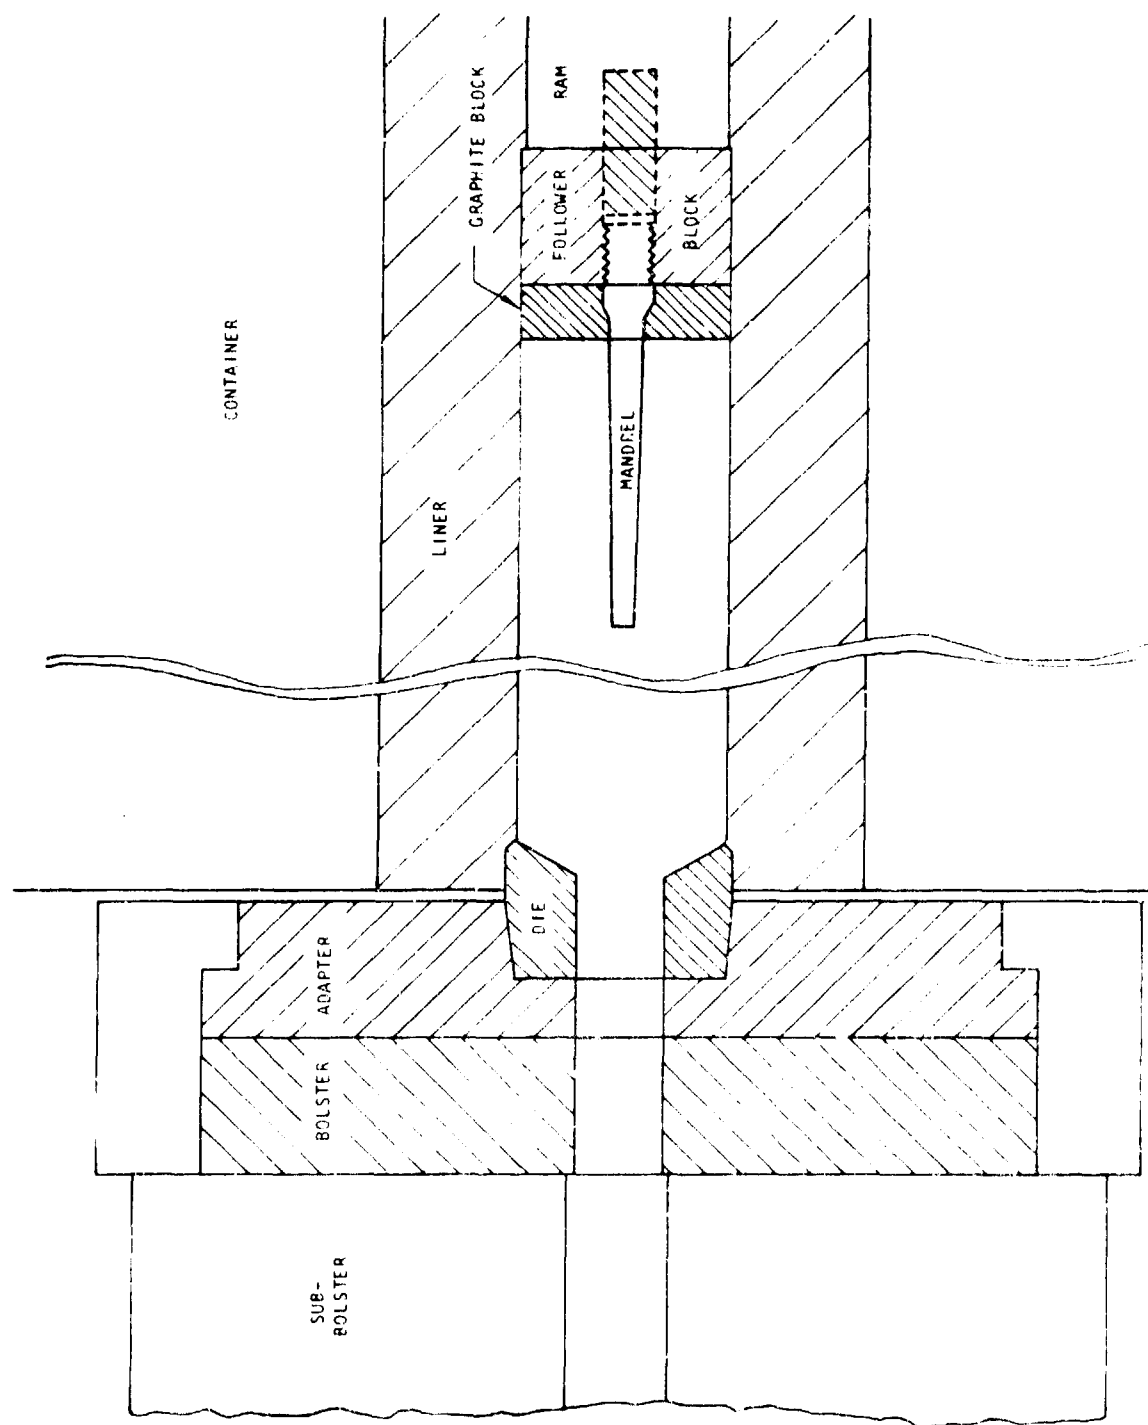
Improved tooling and mandrel (M-21 high speed steel) designs.
